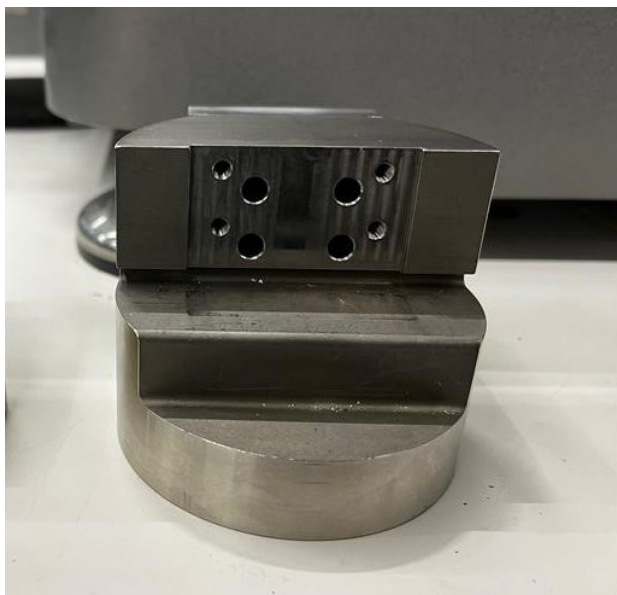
Image of one half of grip manufactured test rig and example of pair of matching coaxially aligned slotted support plates (4° shown here).
